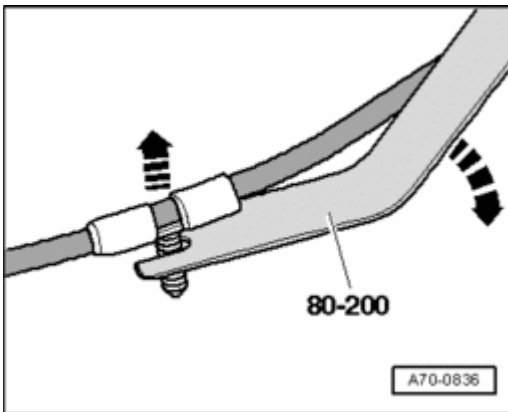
Using Pry Lever 80 - 200 To Remove Instrument Panel Central Tube
